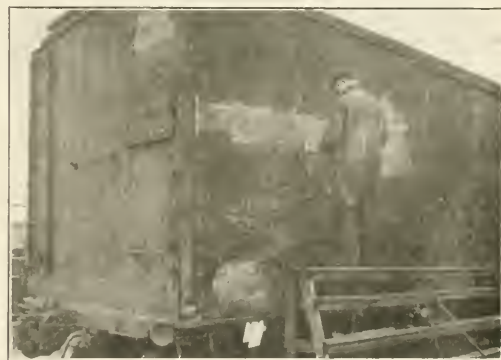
Example of Method of Using Pneumatic Wire Brush Cleaner
